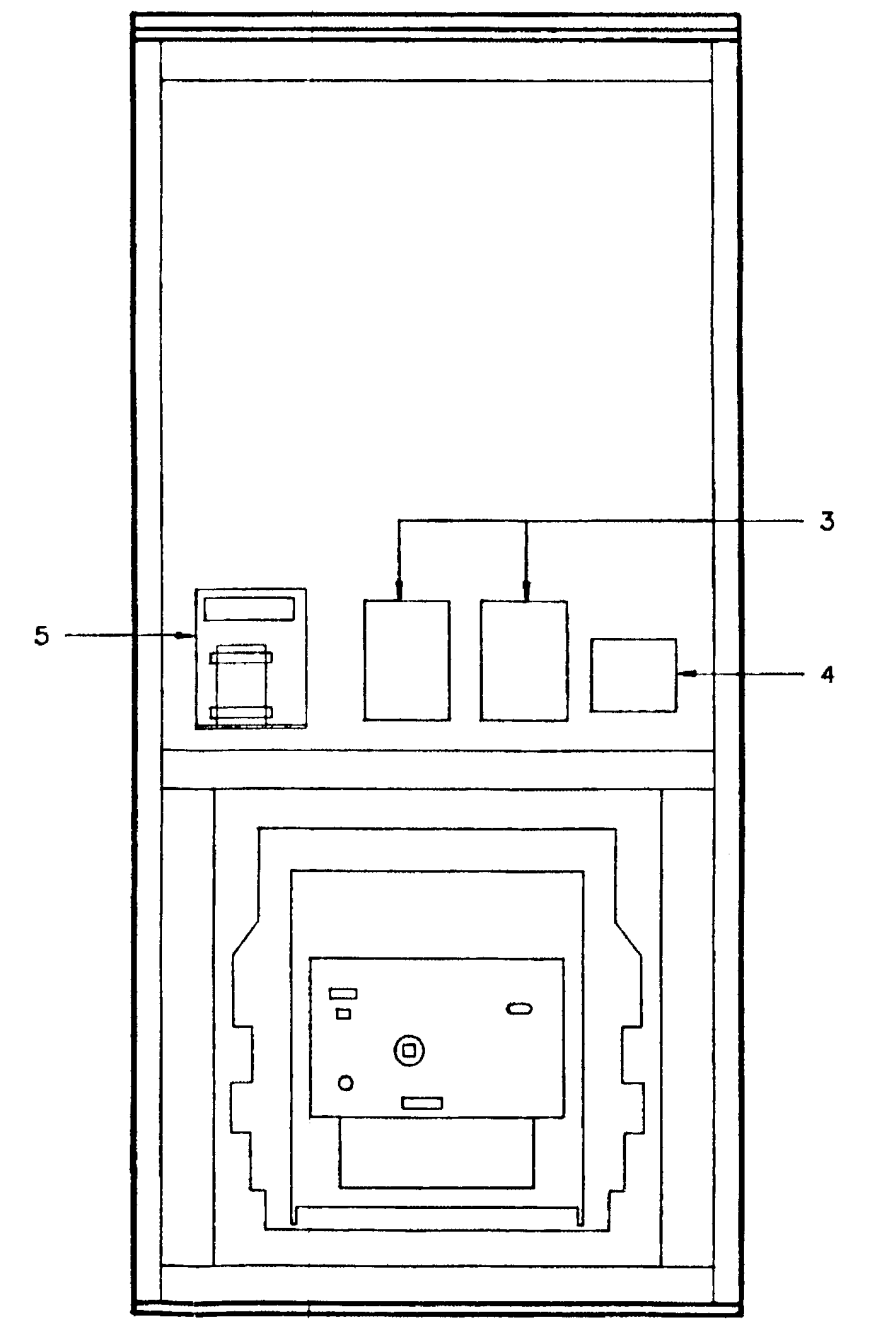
2SA Switchboard Assembly (Sheet 4 of 4)
